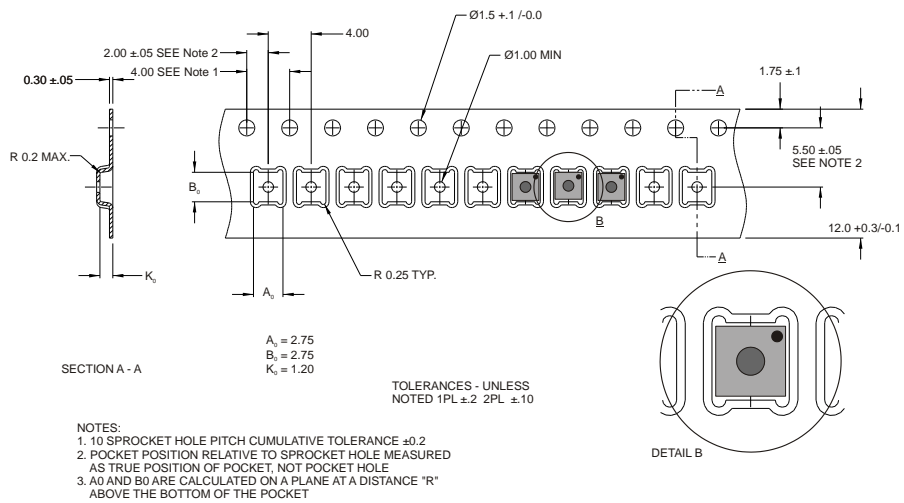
Technical drawing of the packaging tape with sensor orientation in tape. Header tape is to the right and trailer tape to the left on this drawing. Dimensions are given in millimeters.
